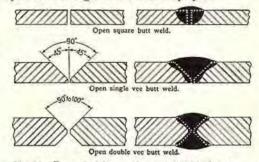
For material more than 3/16'' thick the edges are beveled before welding to an included angle of between 50° and 90° , depending upon the welding process used. For material more than 5/8'' in thickness a double-vee bevel is recommended.
